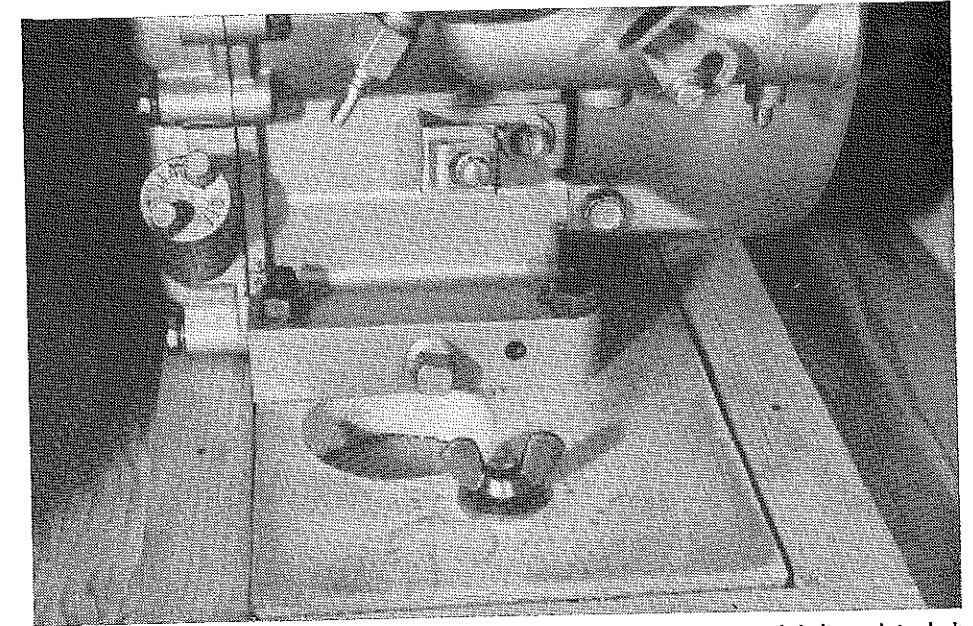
Permanent base board illustrating oil drain hole and wing nut and bolt used to lock engine to base of storage unit.
